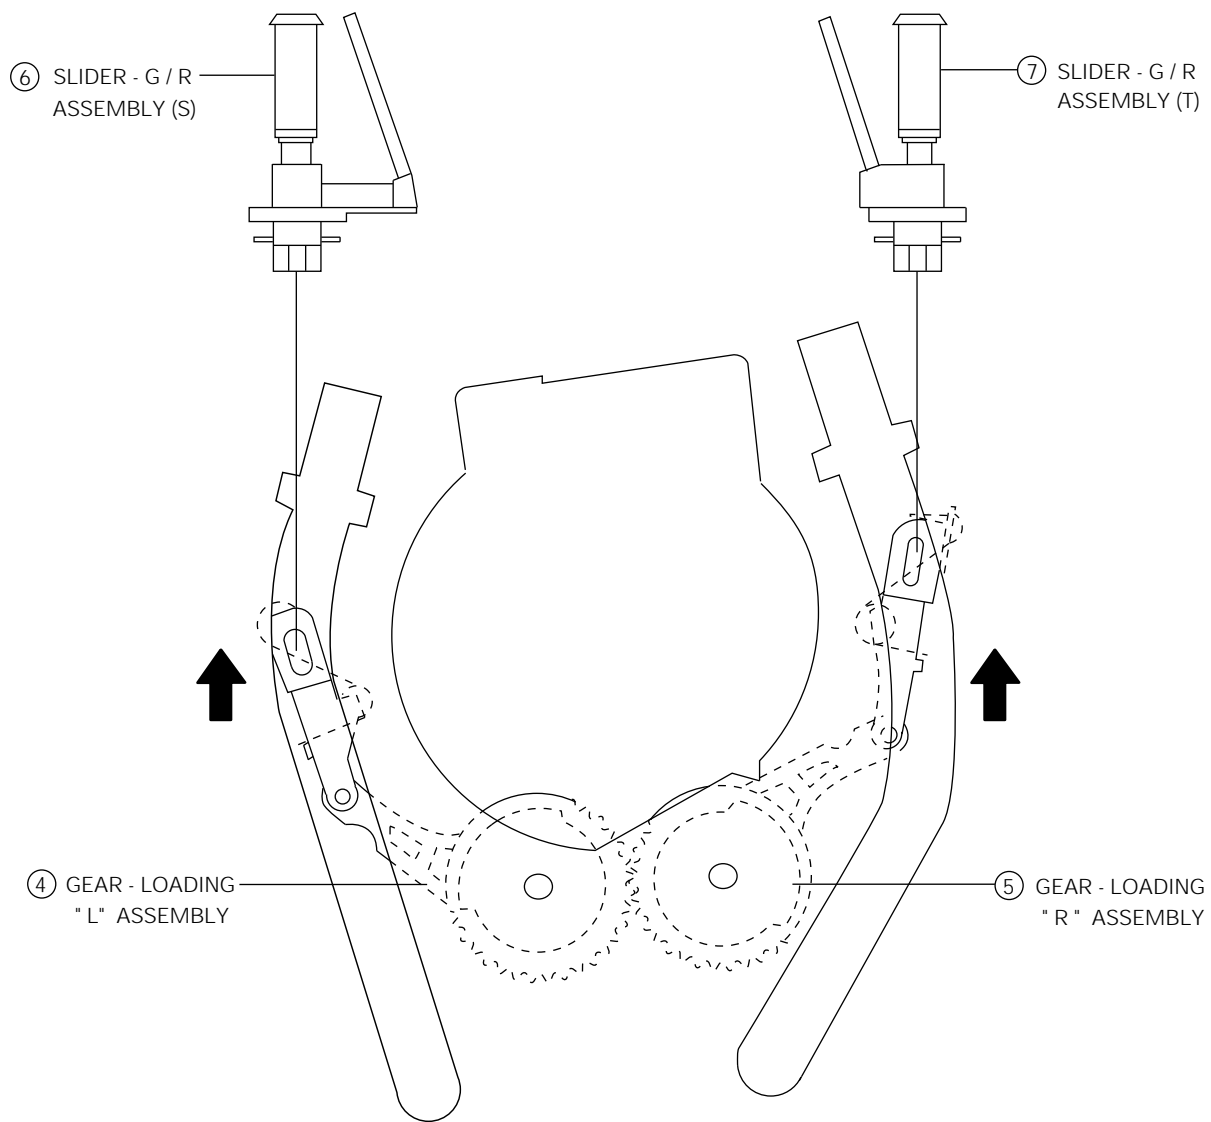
Assembly of Slide Guide Roller "S", "T" Ass'y
